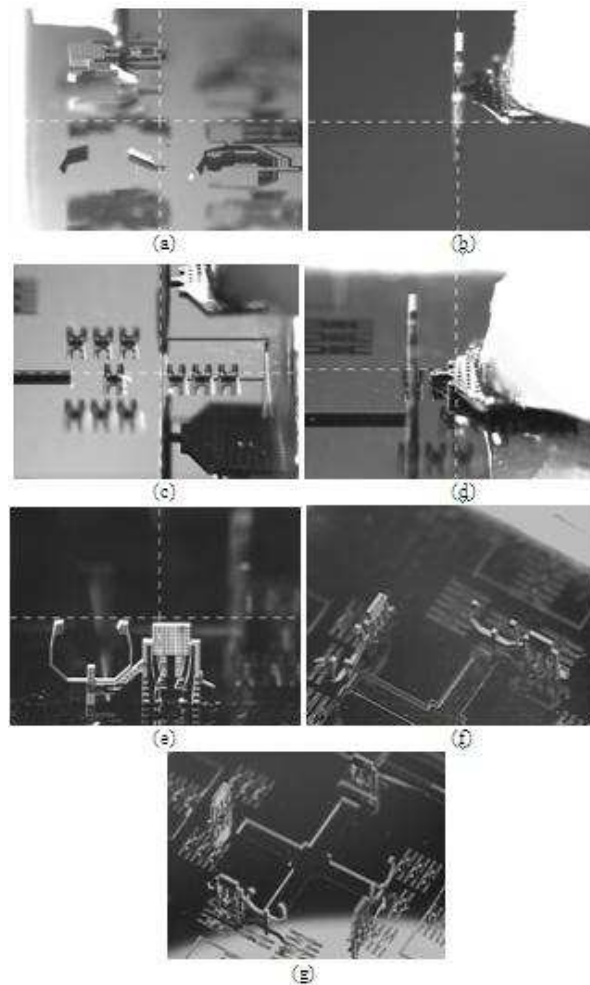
Assembly of MEMS parts by micro jammer, (a) Detethering, (b) 90° Rotation, (c) Approach, (d) Release, (e) One assembly, (f) Two assemblies, (g) Completed assembly of silicon MEMS parts..
